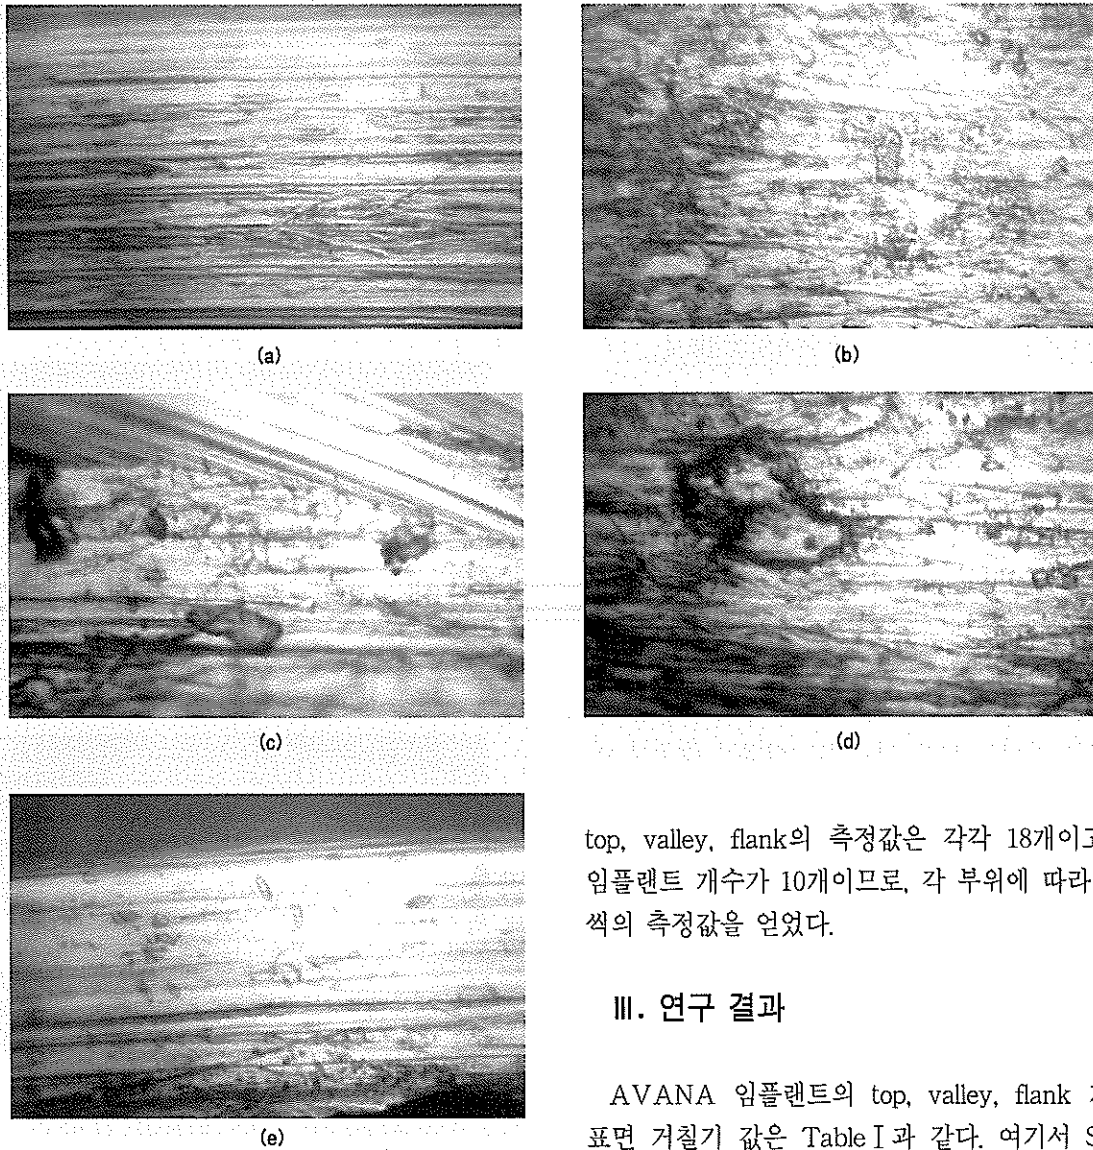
Some examples of turned surface of AVANA implant. (a) typical top with good machining, (b) typical valley with good machining, (c) top having too rough, irregular surface, (d) valley showing irregularly machined surface, (e) top having too narrow width.
